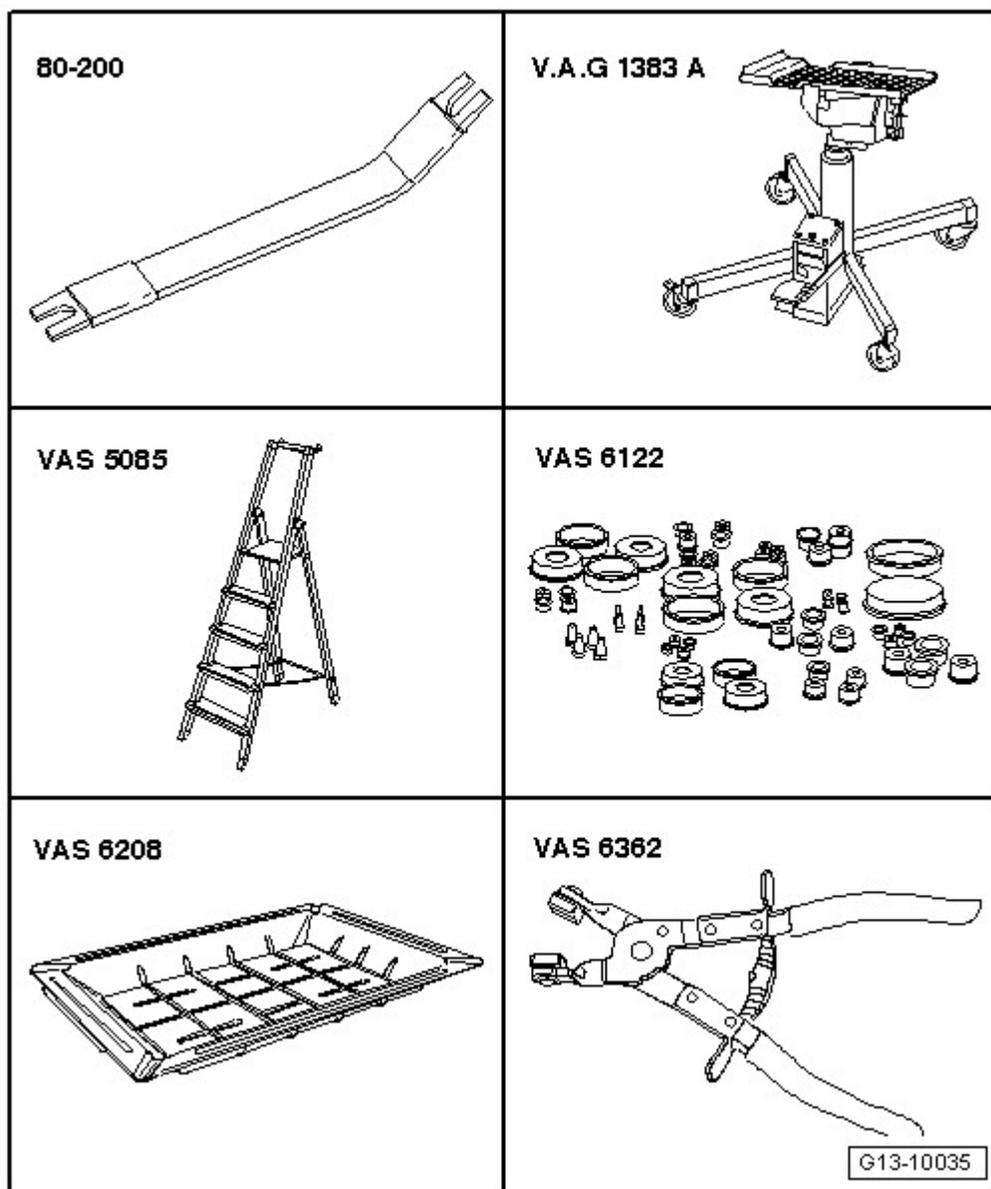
Special Tools And Workshop Equipment (1 Of 2)
